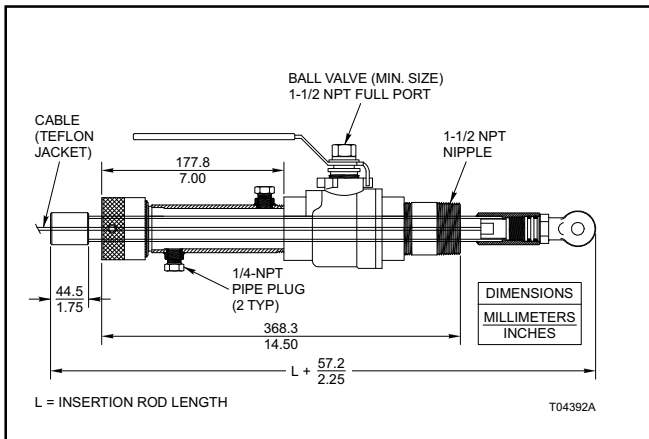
Hot Tap Sensor with Hand Tight Compression Fitting
